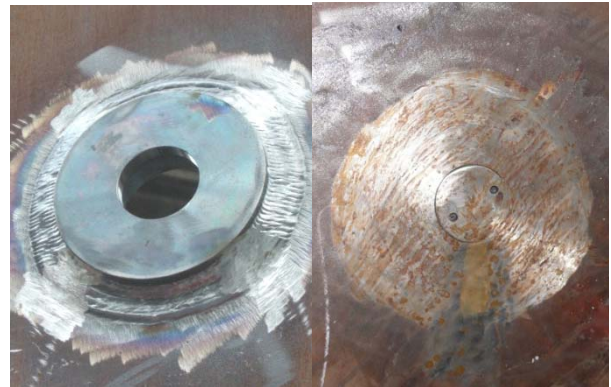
Typical reinforced opening – outside view (left) and inside view (right), Limberg II, Austria [6]
